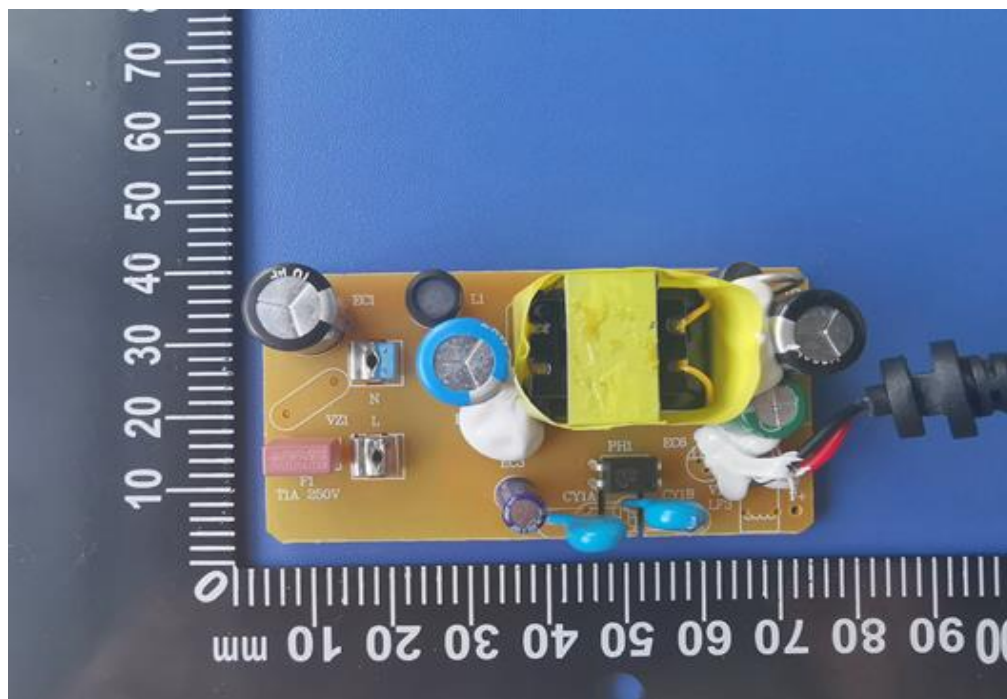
PCB component side view for model IVPxxxx-yyyyW (with D7, without LF3)
